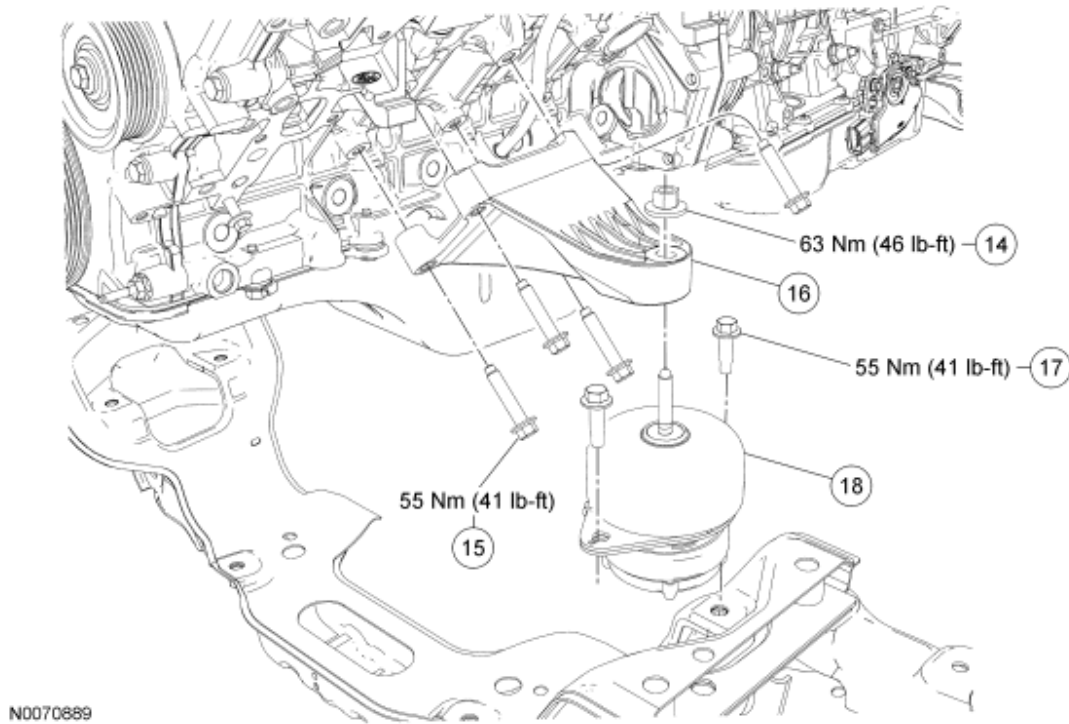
Identifying Engine Support Insulators With Torque Specifications (3 Of 3)
